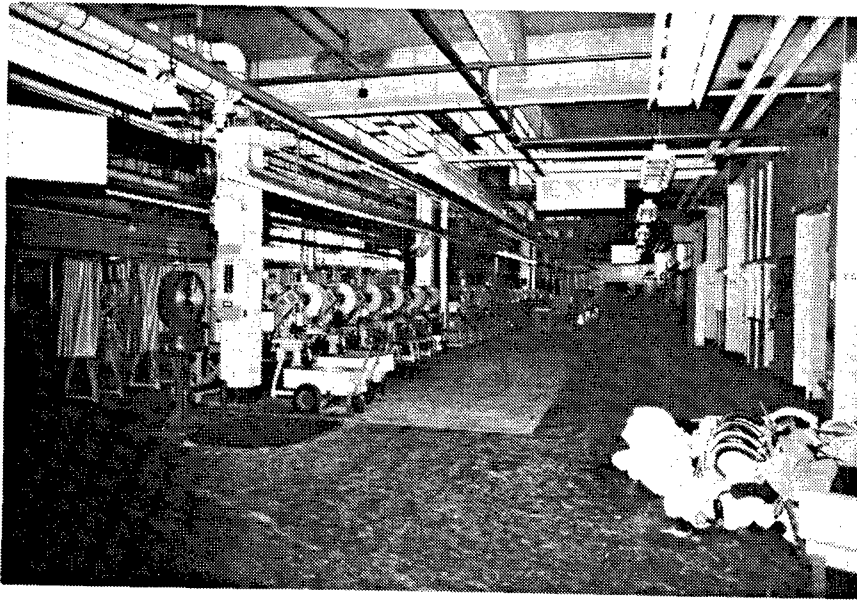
Building 135: Interior view of the Primer Manufacturing Plant showing the in-place Primer Machines.
